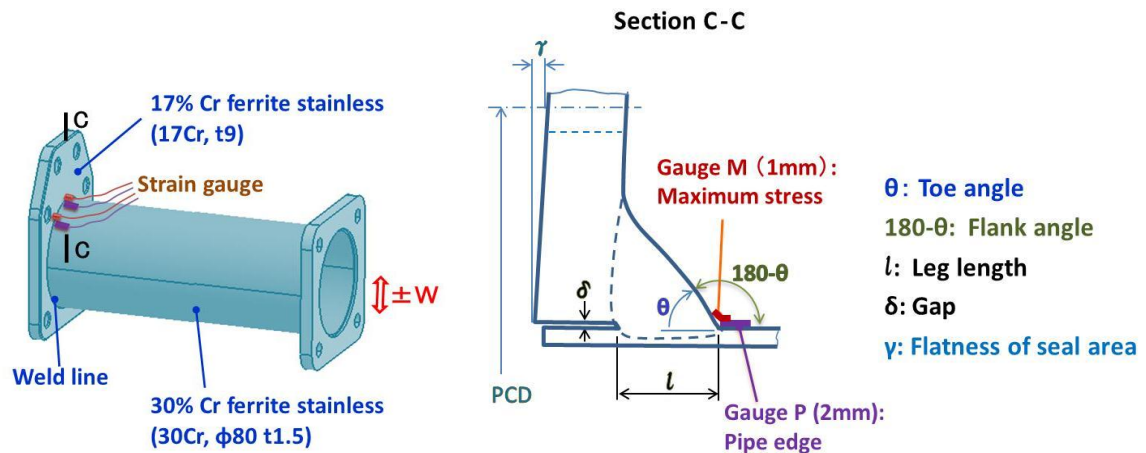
Schematic welded joint and strain gauge position
